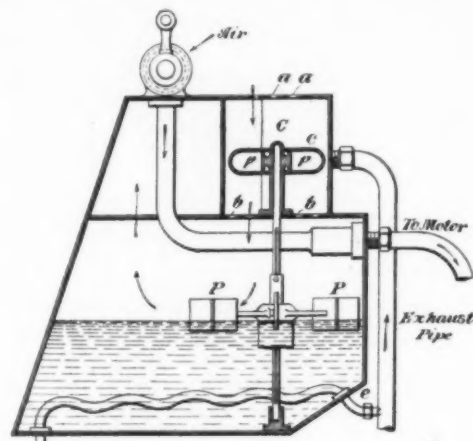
SURFACE CARBURETER WITH SPLASHING DEVICE.
